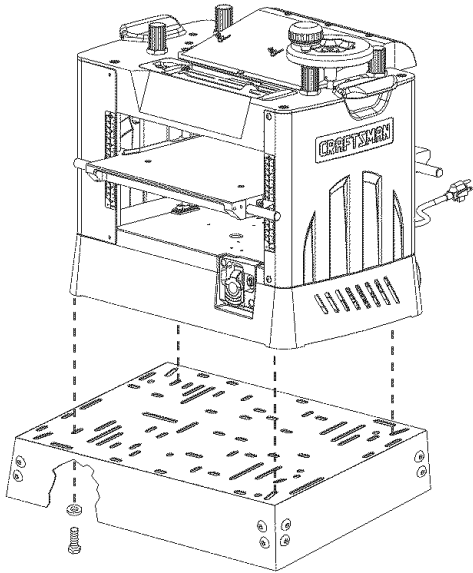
Mount Planer/Molder to Optional Multi-Purpose Tool Stand Model No. 222240
